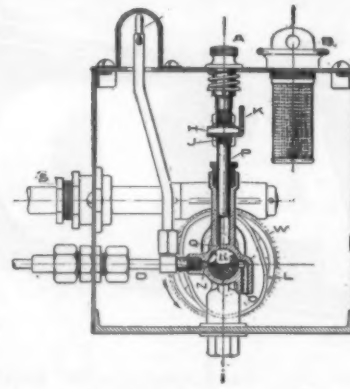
PUMP DELIVERS ALTERNATELY TO SIGHT-FEED AND BEARINGS.
